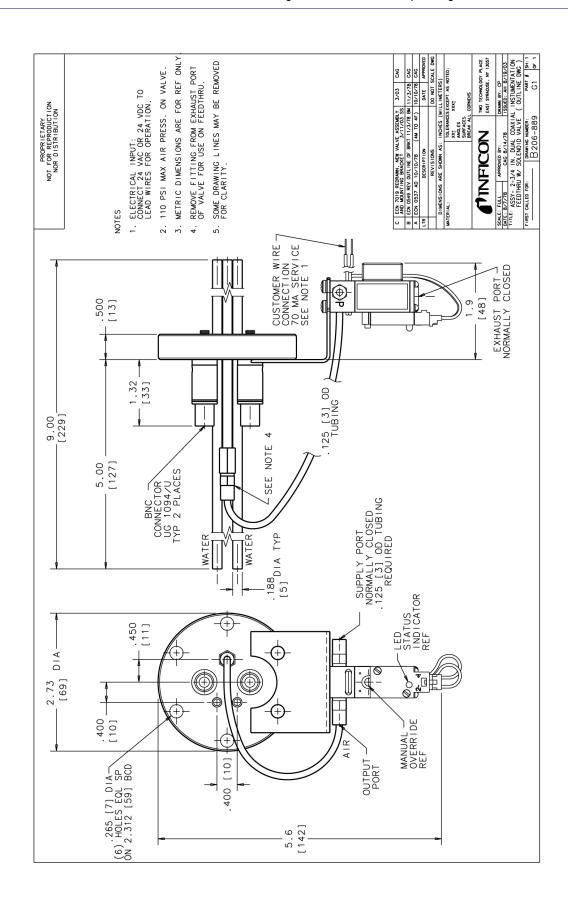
2-3/4 in. Dual coaxial feedthrough and valve assembly
